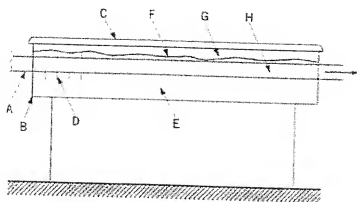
Vacuum calibrator for pipe and tubing extrusion: A, molten tube from die; B, tank; C, hinged cover with gasket; D, sizing rings; E, circulated and temperature controlled water; F, water level; G, vacuum; and H, inside of pipe open to atmospheric pressure (20).
